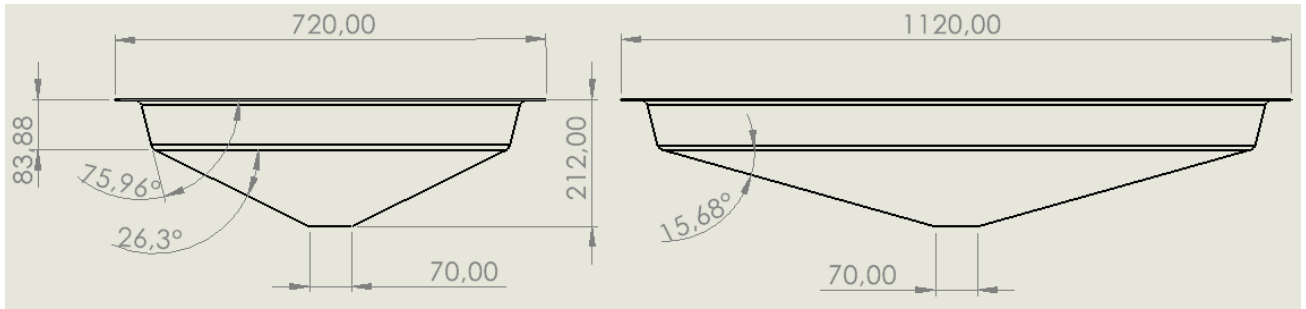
Technical drawing showing drain pan angles and basic dimensions (SolidWorks drawing view).
